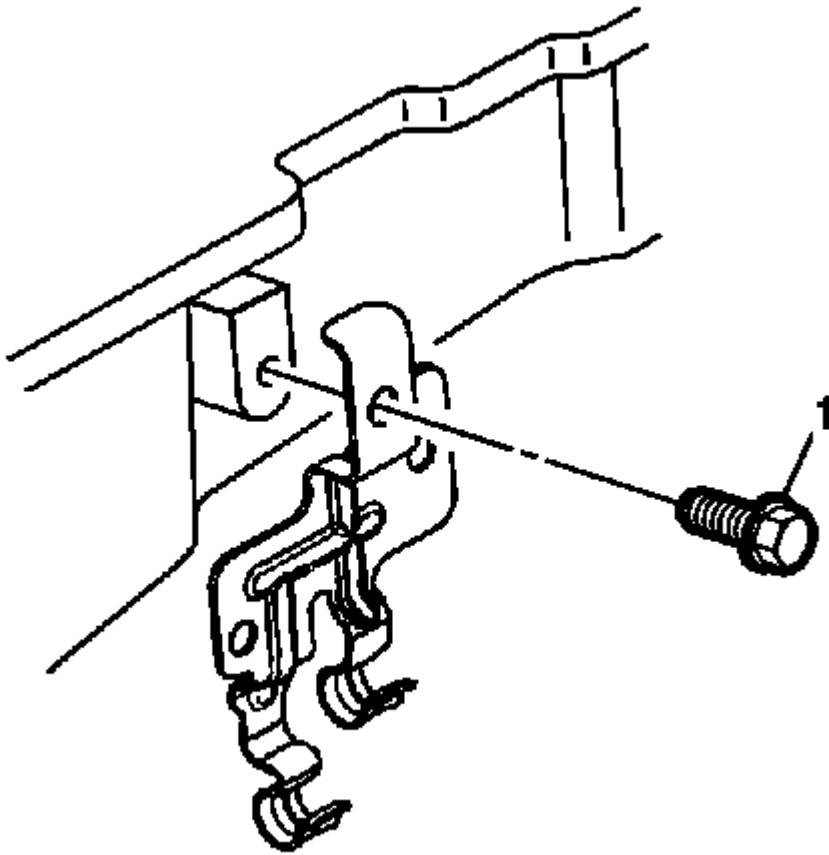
View Of Positive Battery Cable Clip & Bolt
